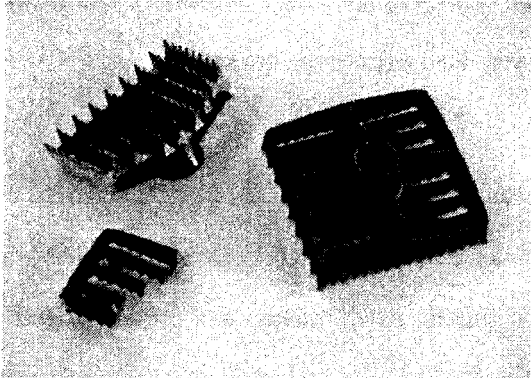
Original Casting and failed castings (courtesy of Cleveland Engineering Ltd)
